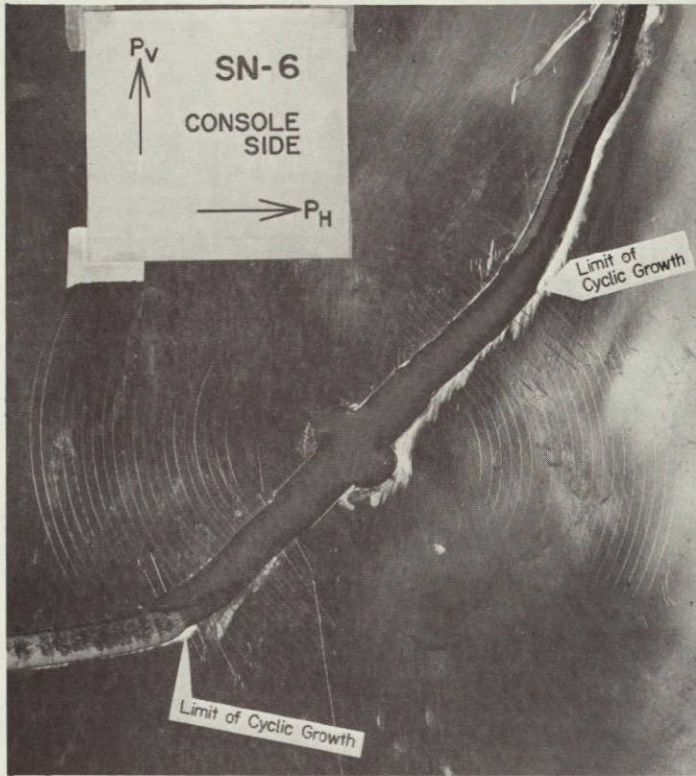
Closeup of SN-6 after Testing, Console Side.
